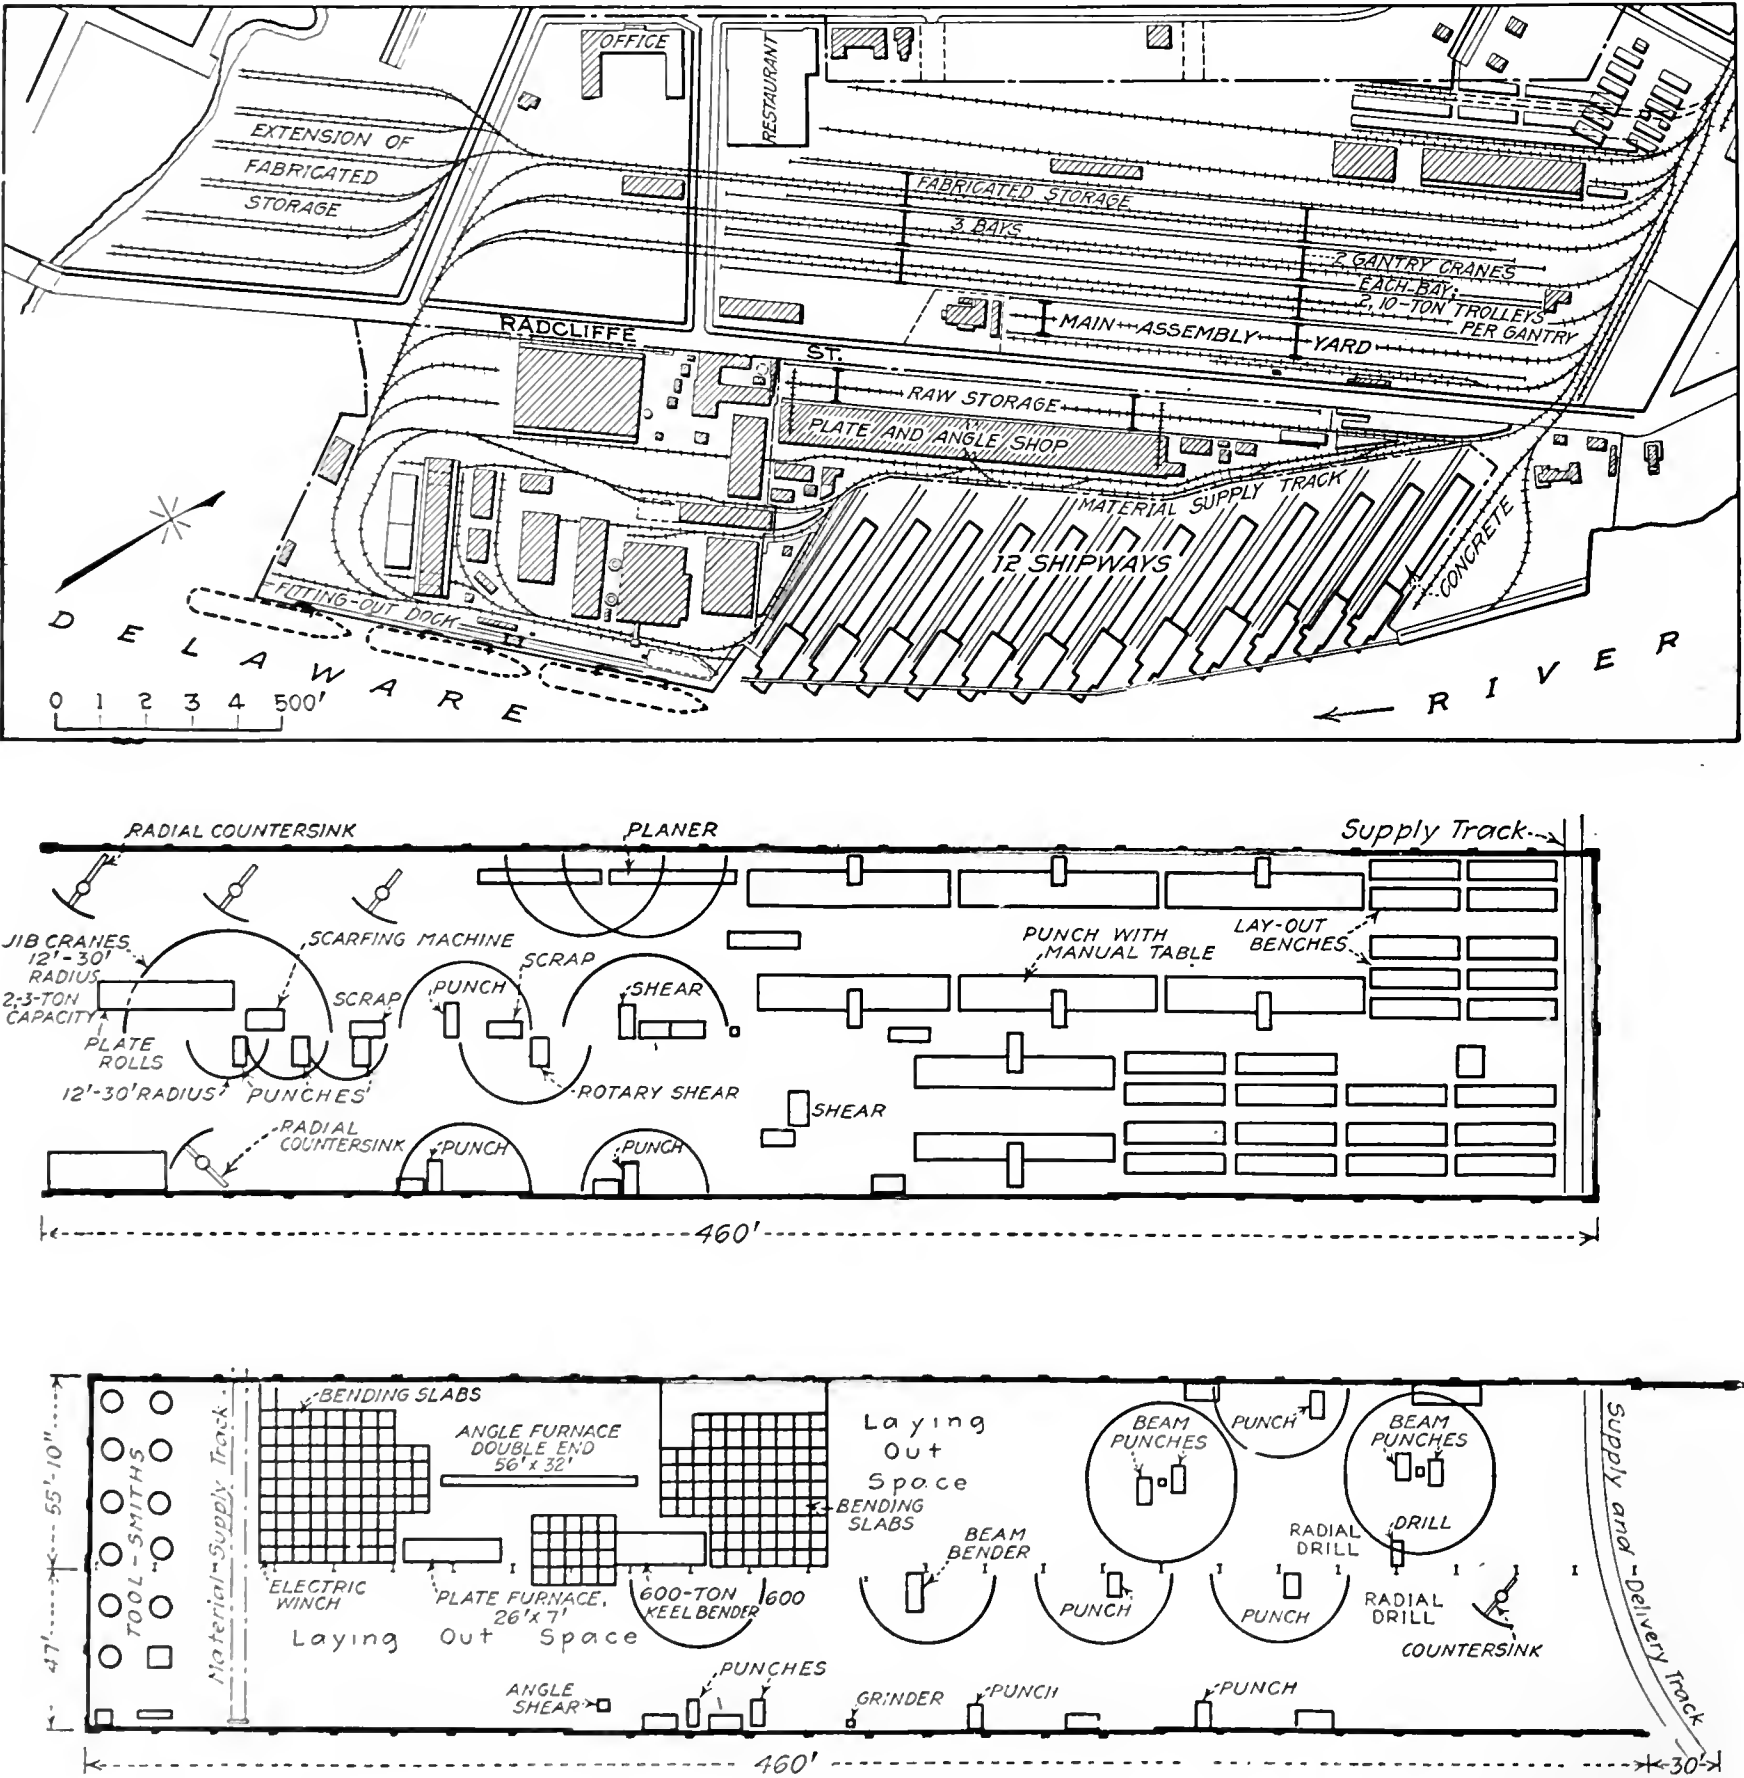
GENERAL PLAN OF FABRICATED SHIPYARD AND LAYOUT OF PLATE-AND-ANGLE SHOP AT BRISTOL MERCHANT SHIPBUILDING CORPORATION, AGENT FOR EMERGENCY FLEET CORPORATION
